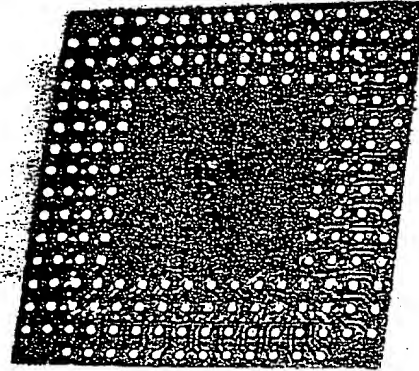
Flex Interposer with solder balls for the CSP attach to the board
